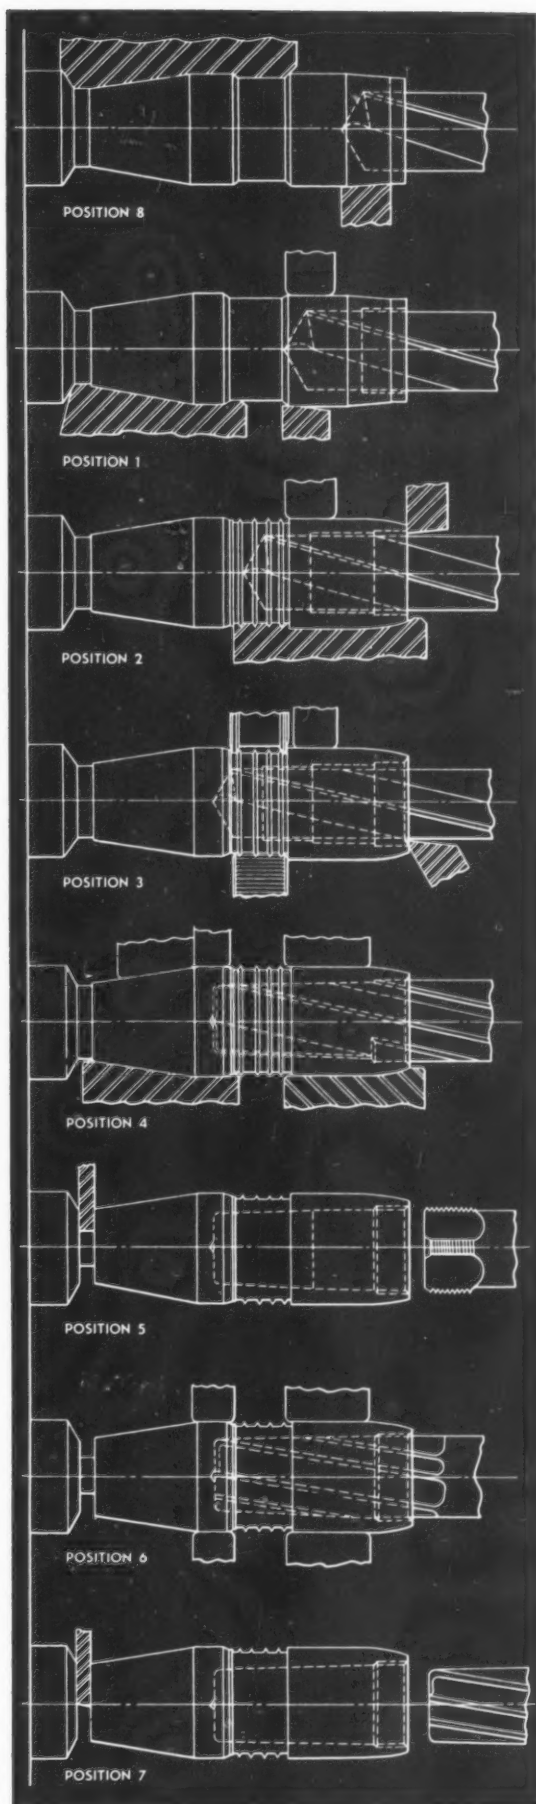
Tooling Arrangement for Making a 37-millimeter High-explosive Steel Shell on an Eight-spindle Machine
